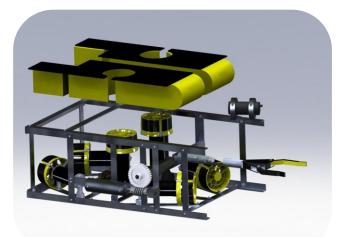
Solidworks drawing showing ROV Competence's buoyancy cartridge being lowered in to the frame
